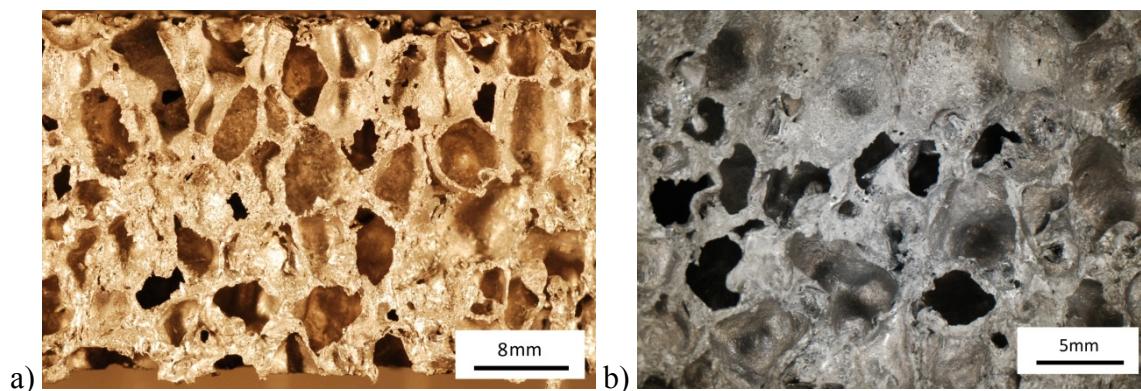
a) and b) Macroscopic images of the surface after circular saw mechanical cutting
